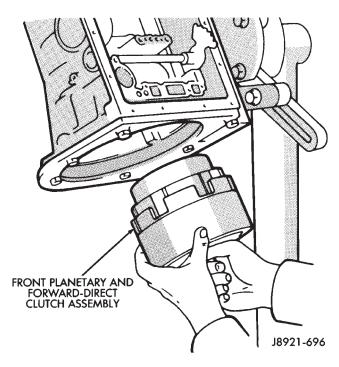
Installing Front Planetary And Forward-Direct Clutch Assembly
